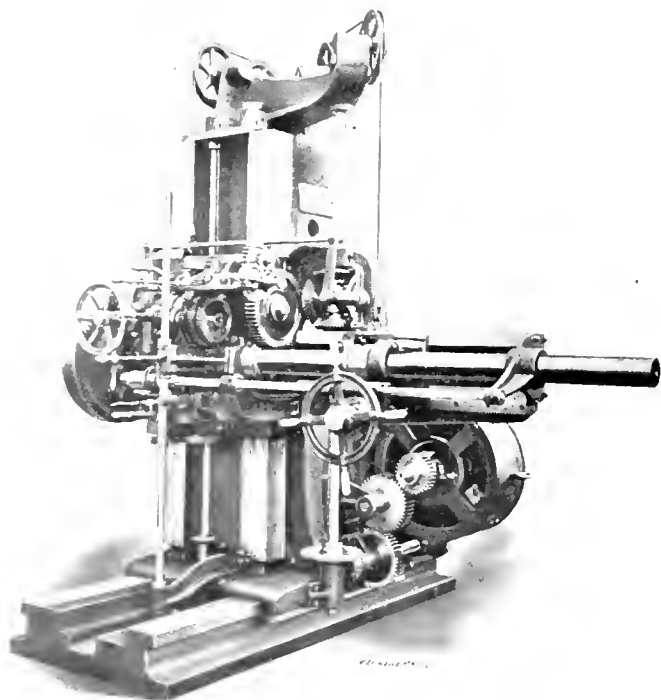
Newton Horizontal Boring, Drilling and Milling Machine.
